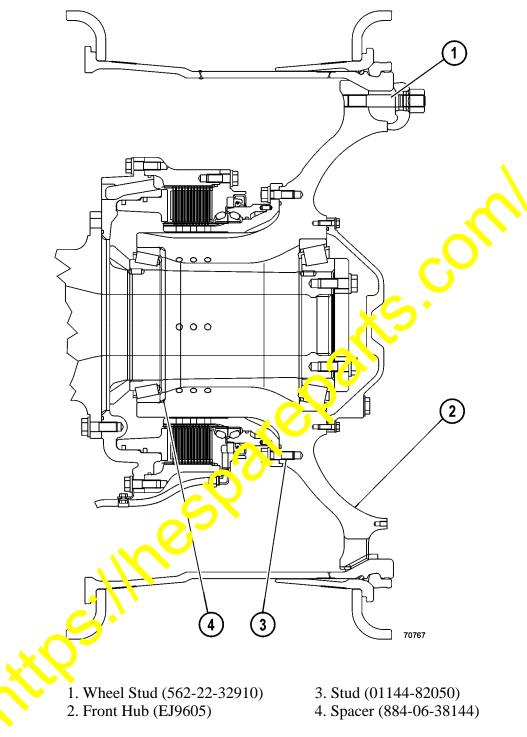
WHEEL ASSEMBLY (NEW HUB)
